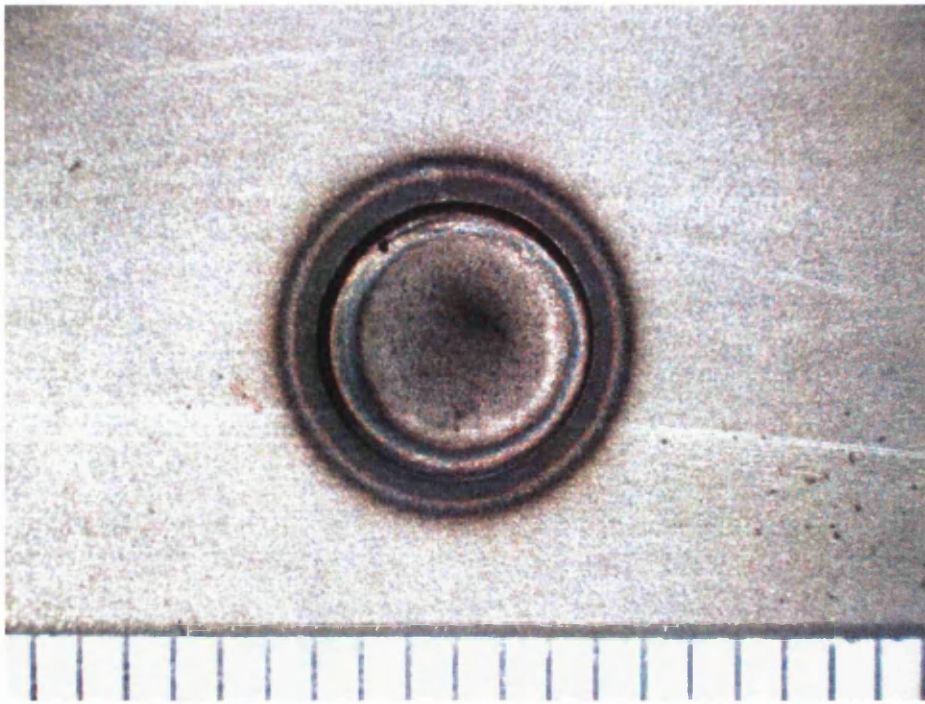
Photograph of the surface appearance of a spot weld produced with properly aligned electrode tips (Scale is in mm)
